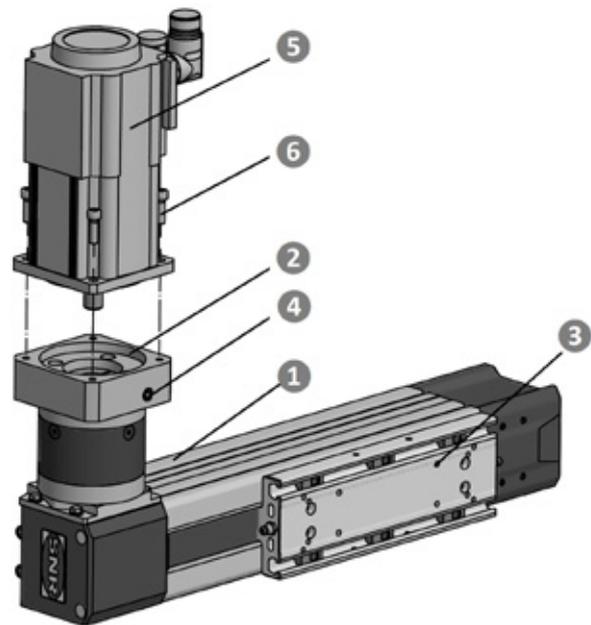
Drive assembly on linear axis with planetary gearbox
